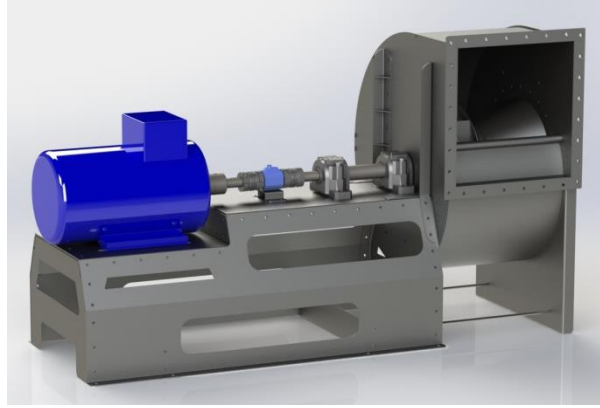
Test fan setup with motor and torque transducer (highlighted in blue).
